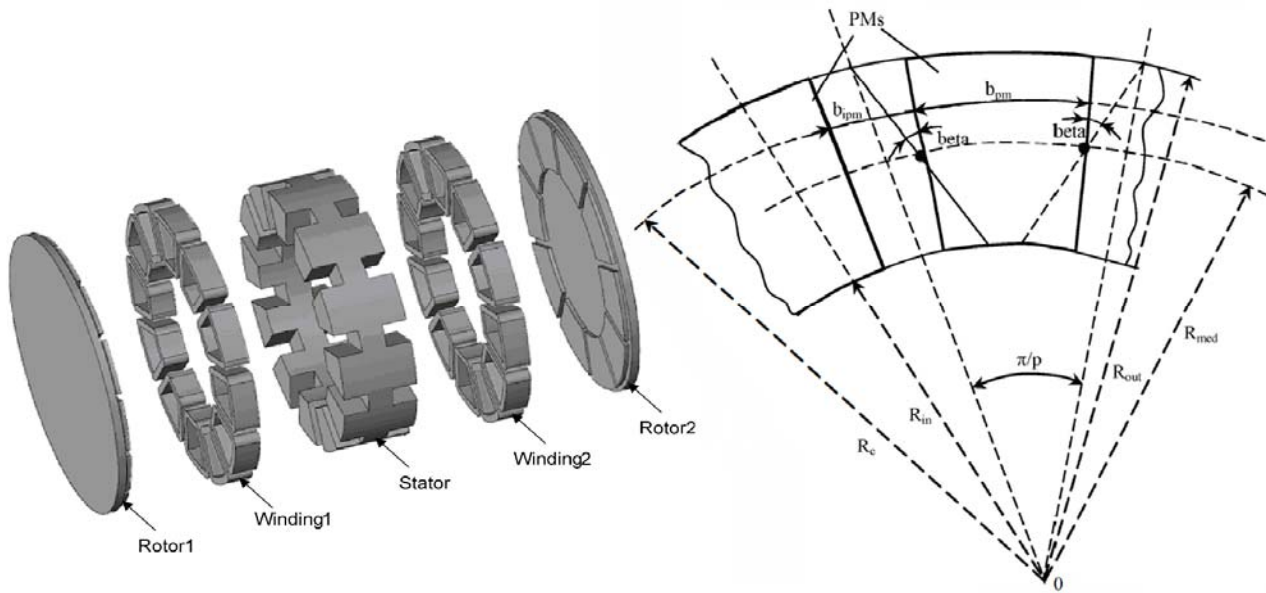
Three-dimensional exploded view of single stator and dual rotors PMSM [Tut 12d] and skewed PMs [Tut 12c].
